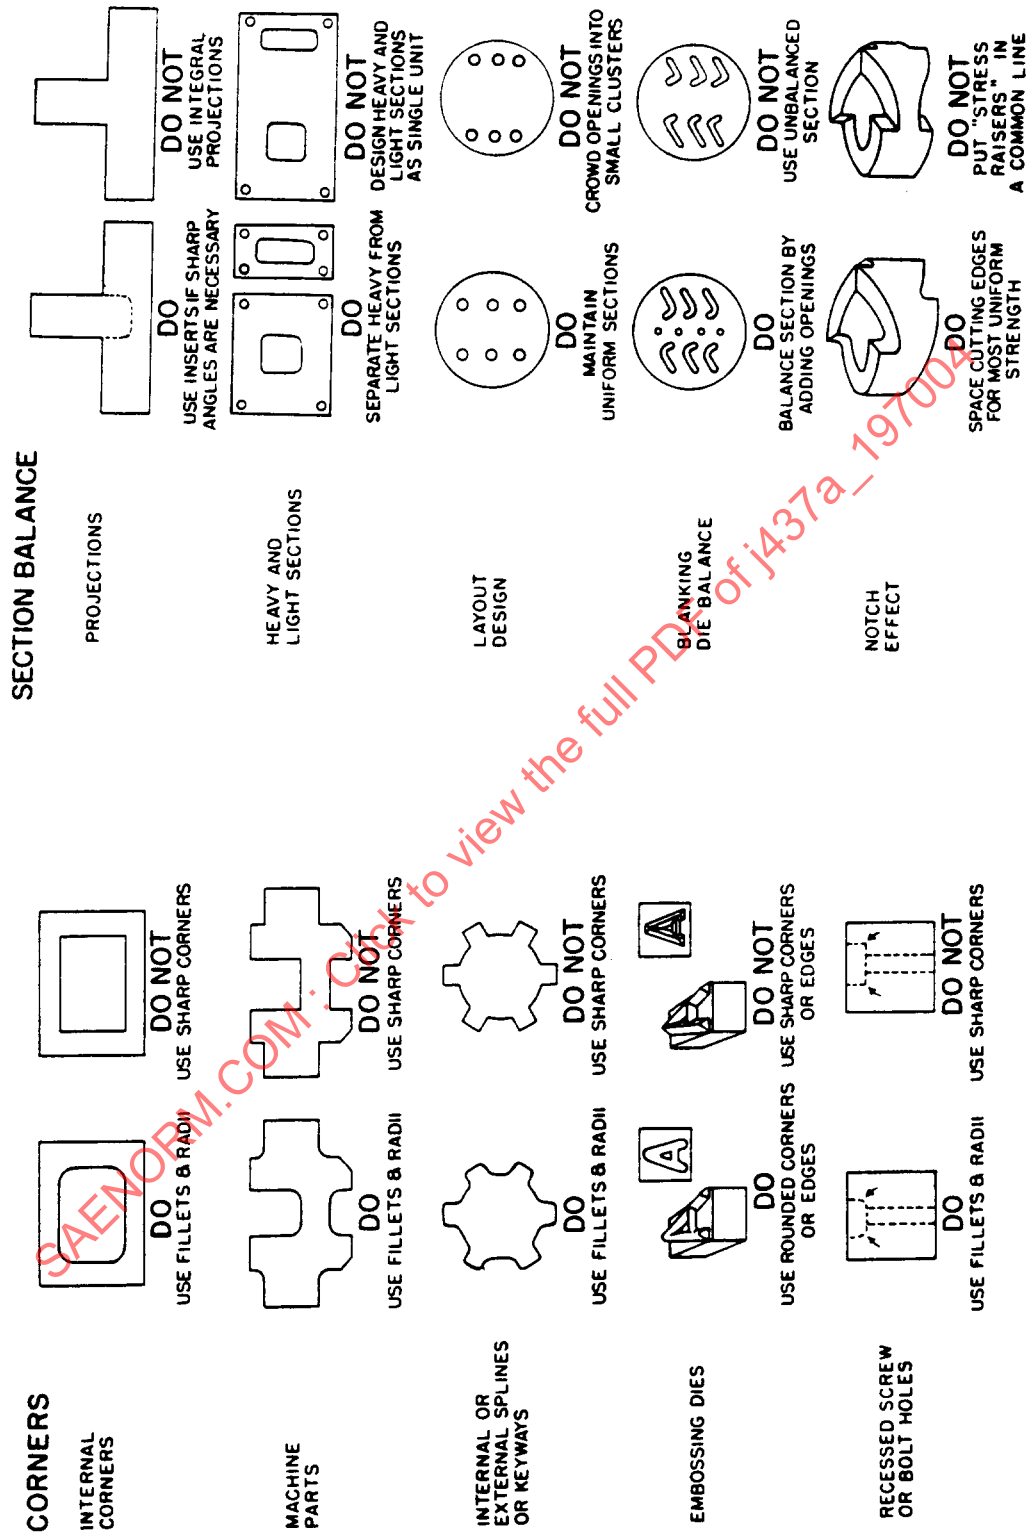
TOOL AND DIE DESIGN TIPS (TO REDUCE BREAKAGE IN HEAT TREATING)
